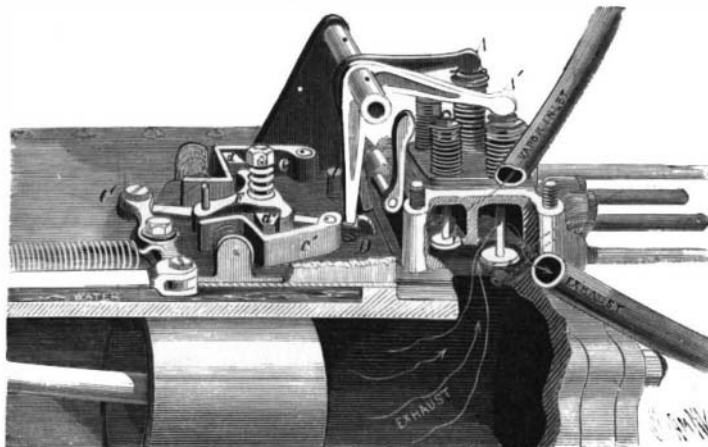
VALVE MOTION OF MOTOR CYCLE.
